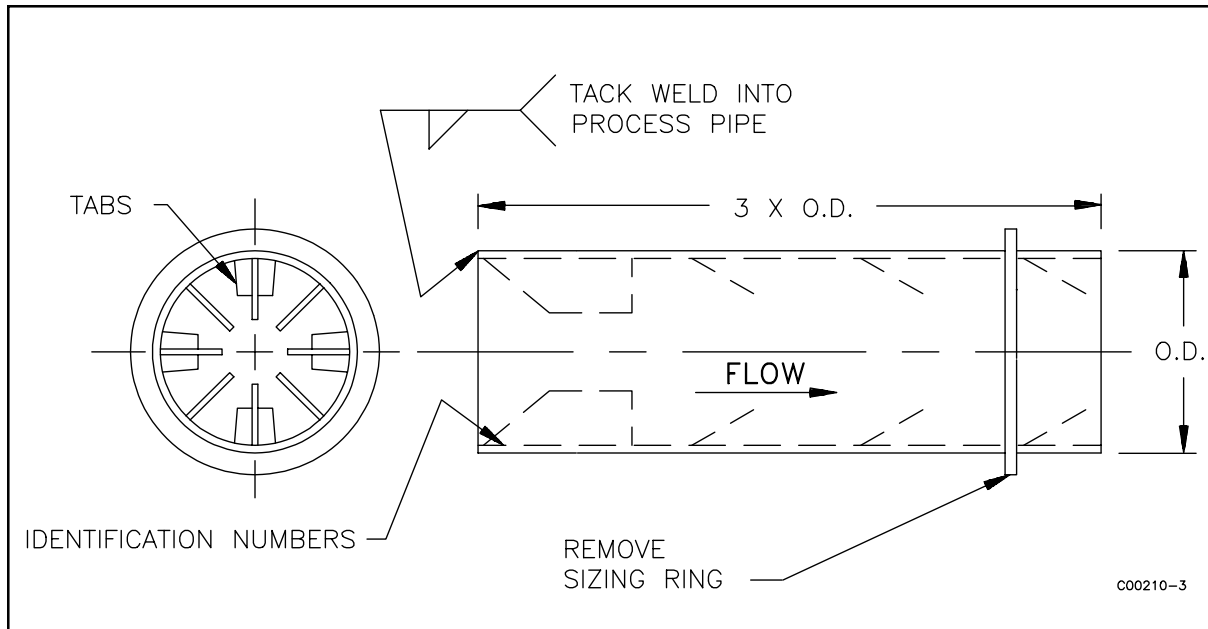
Typical Tack Weld Installation of an VIS
